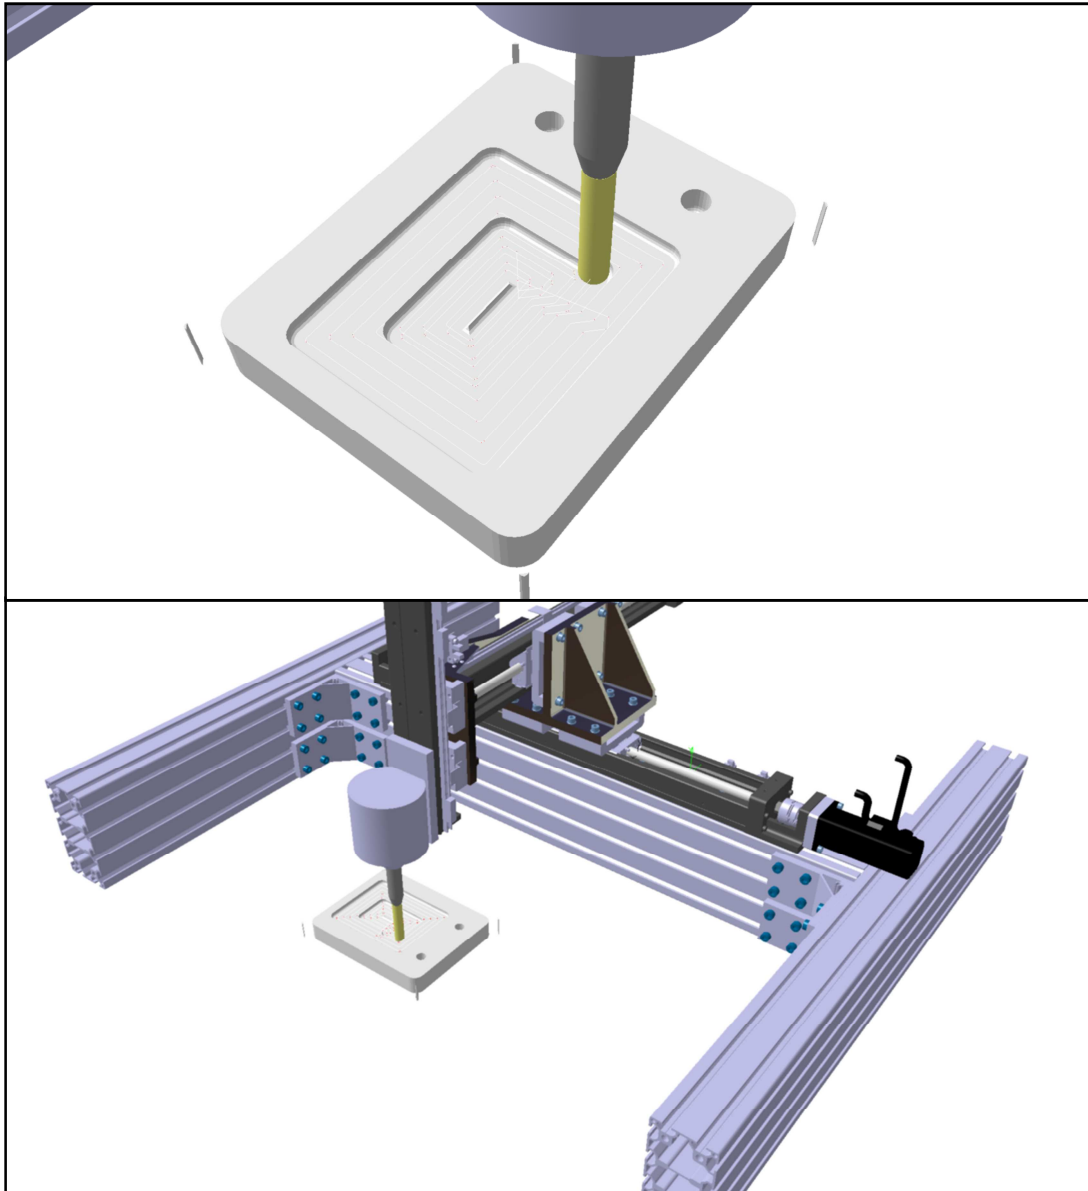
Catia machine tool simulation with tool path G-Code generation
